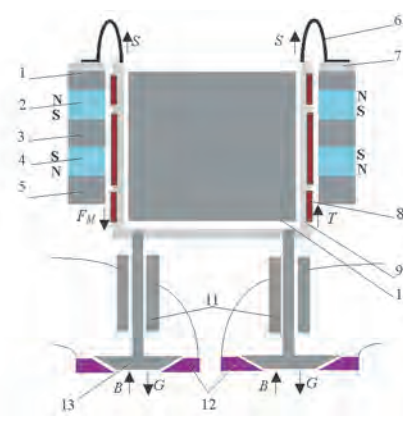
The schematics of the blocked magnetolectric valve driving, configuration 2; 1, 3, 5 – the pole shoe, 2, 4 – sintered magnet, 6 – base, 7 – spring, 8 – coil winds, 9 – coil form, 10 – core, 11 – valve guide, 12 – valve seat, 13 – valve
